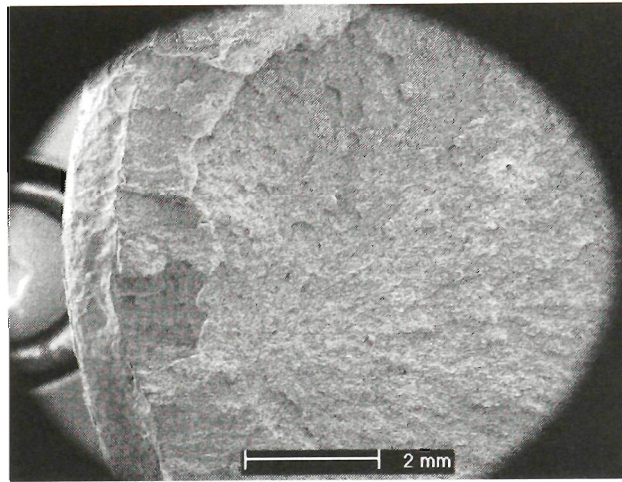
Stepped fracture surface of rock bolt from colliery A.
